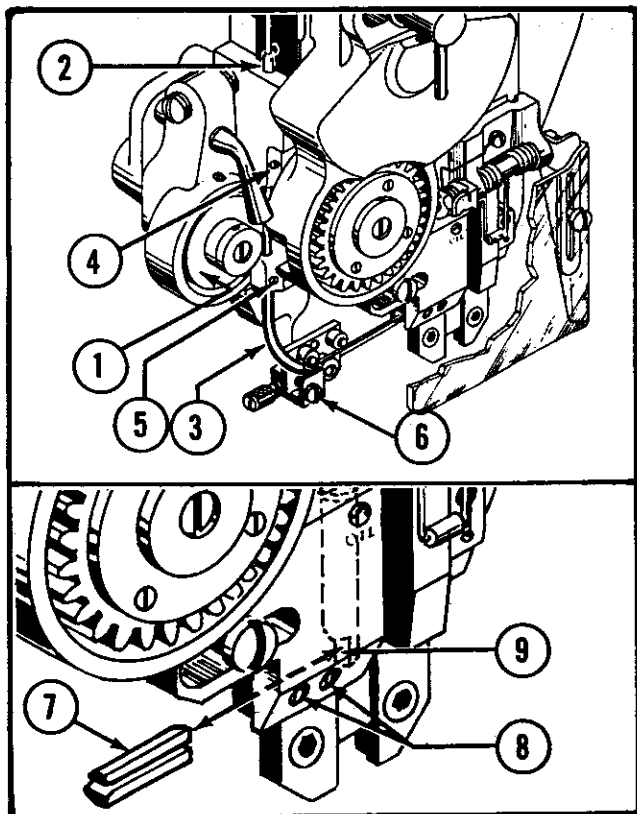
Inspecting Wire Feed Gears, Tubes, and Stationary Cutter
